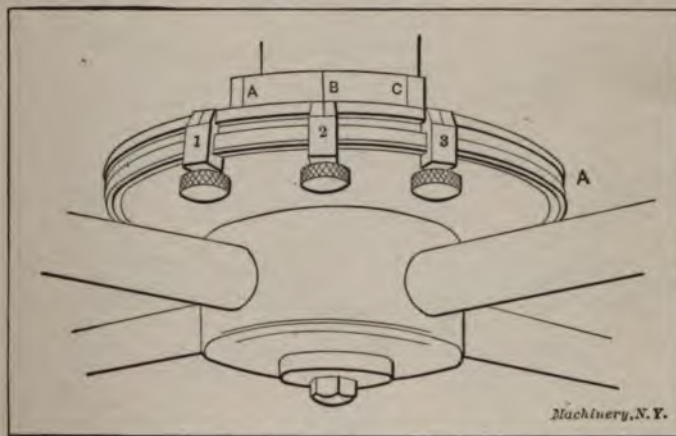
Enlarged Detail of the Indicator of the Device shown in Fig. 13
